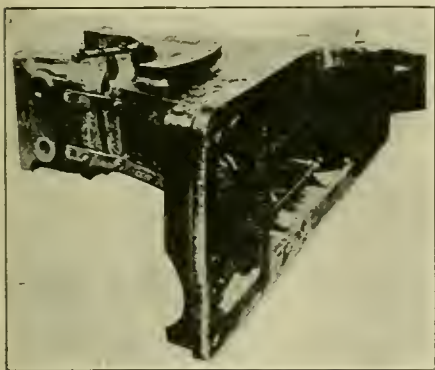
BROKEN SECTIONS OF CAST IRON AIR COMPRESSOR BACK FRAME LINED UP FOR WELDING.
